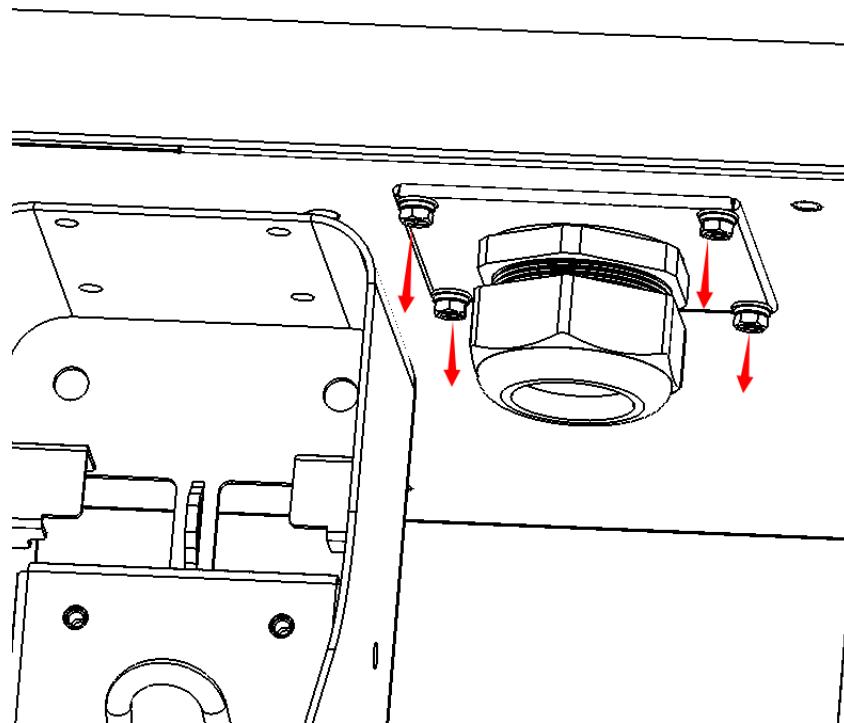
Removal Diagram of the Cover Plate of the Cable Gland
